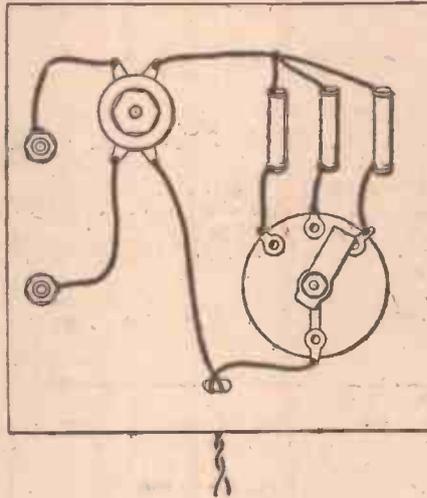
Suggested layout, and wiring diagram of the meter unit.
